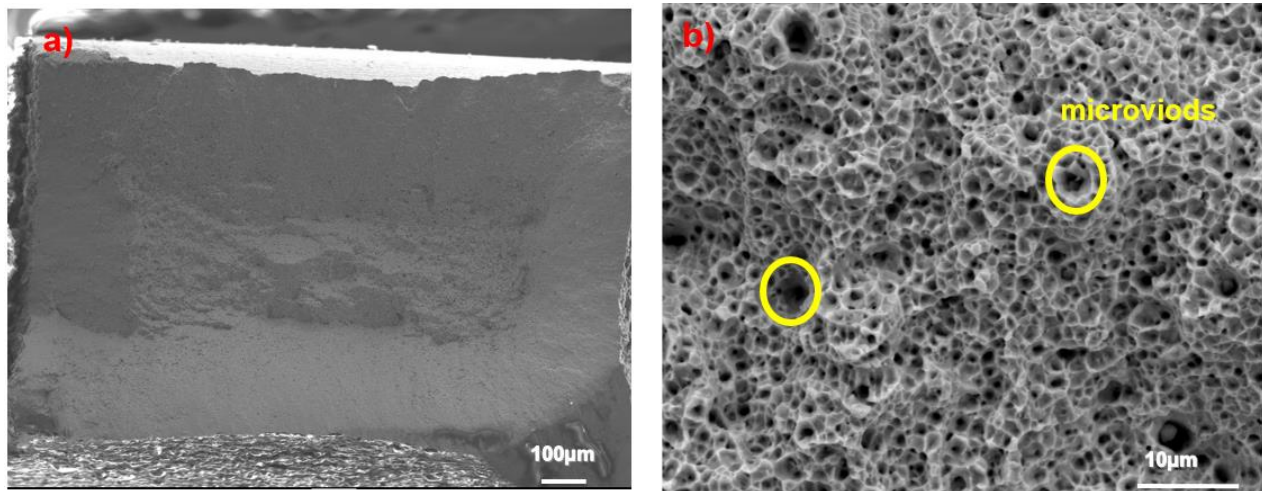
Fractography images of annealed sample at 900°C for 4hr a) fracture tip b) fracture surface
